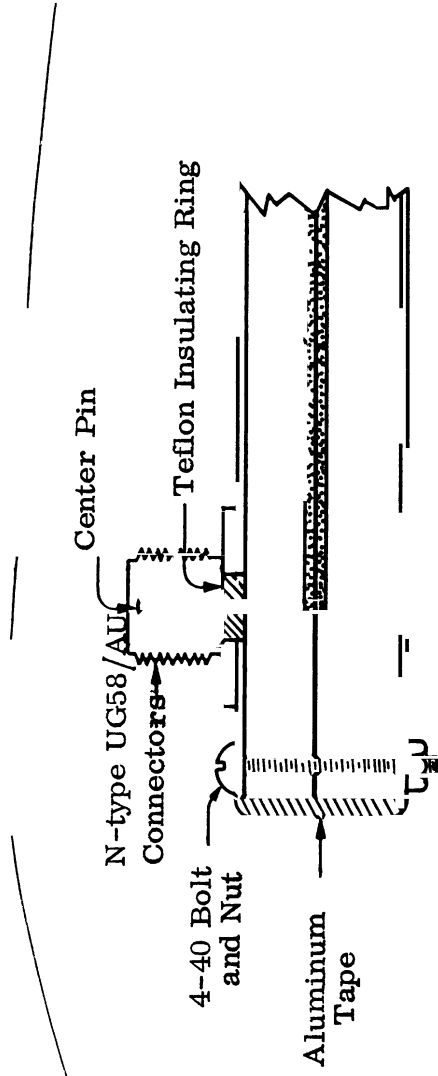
CROSS SECTION VIEW OF OUTPUT PORT JUNCTION METHOD FOR CONNECTING COAXIAL CONNECTOR TO STRIP RADIAL TRANSMISSION-LINE INNER DISC. Also shown are the general construction features of the fastening nut and bolt, shorting tape and coupling aperture.
